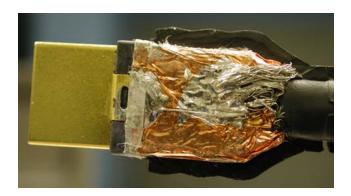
Well-shielded HDMI cable with braid soldered to copper tape and tape soldered to metal tab.
